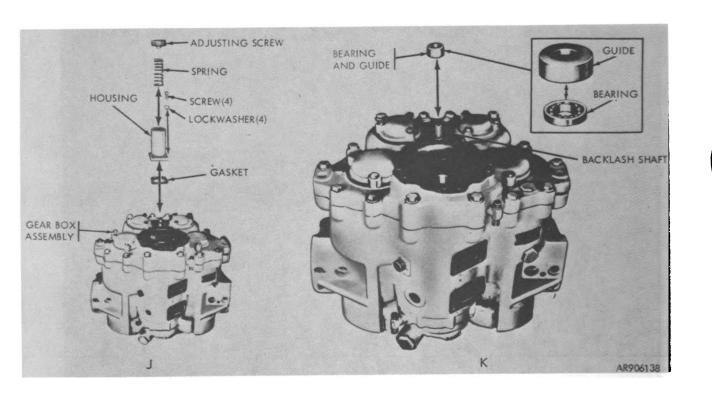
Traversing gearbox disassembly or assembly (5 of 15).
